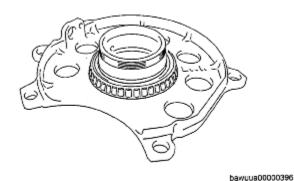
Identifying Tapered Roller Bearing And Center Support Courtesy of MAZDA MOTORS CORP.
